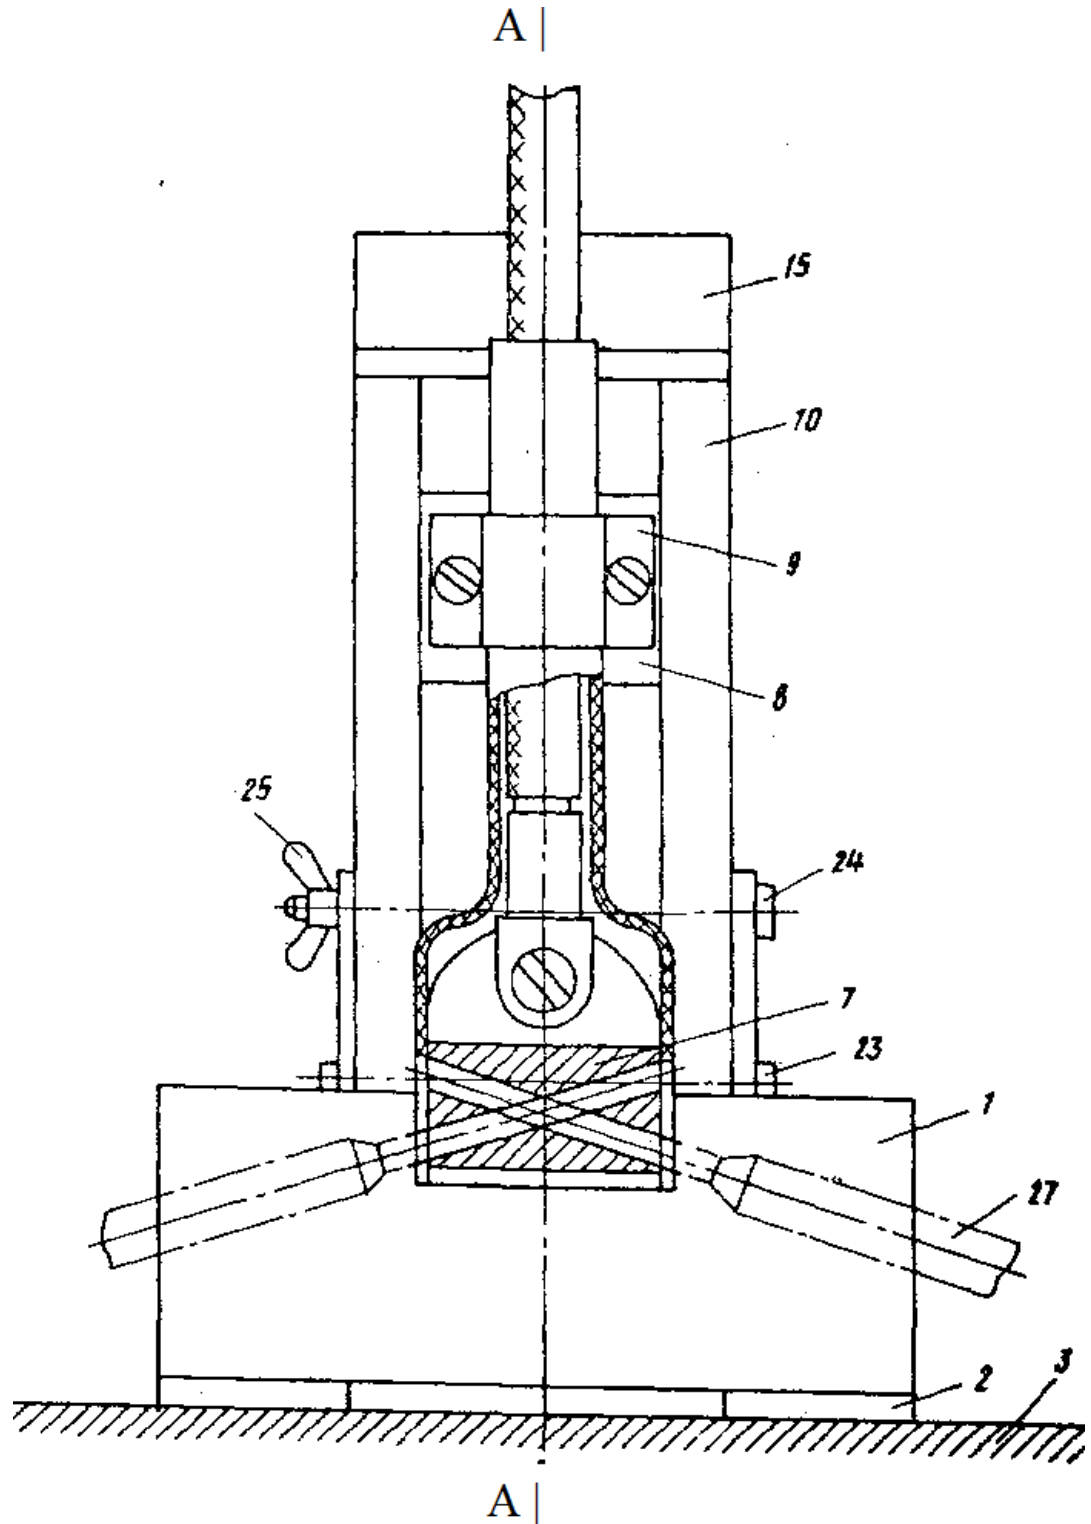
a – electrode holder device for welding with an inclined electrode
